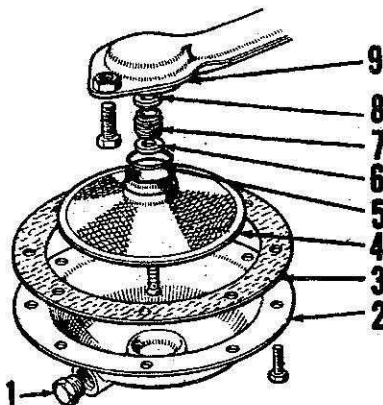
View showing early type suction screen, cover and magnetic filter; refer to Fig. 176 for late models using full flow filter element instead of by-pass filter as shown in Fig. 174.
